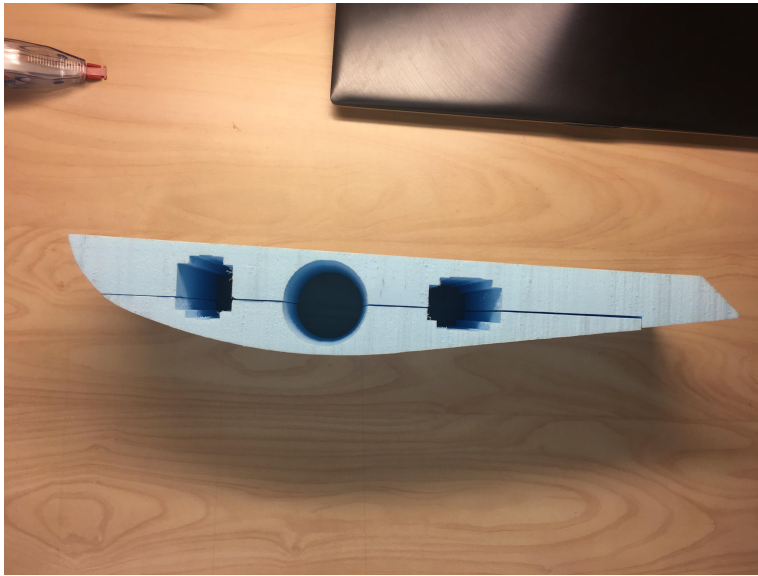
Early prototype milled in styrofoam to test machinery and milling techniques.
